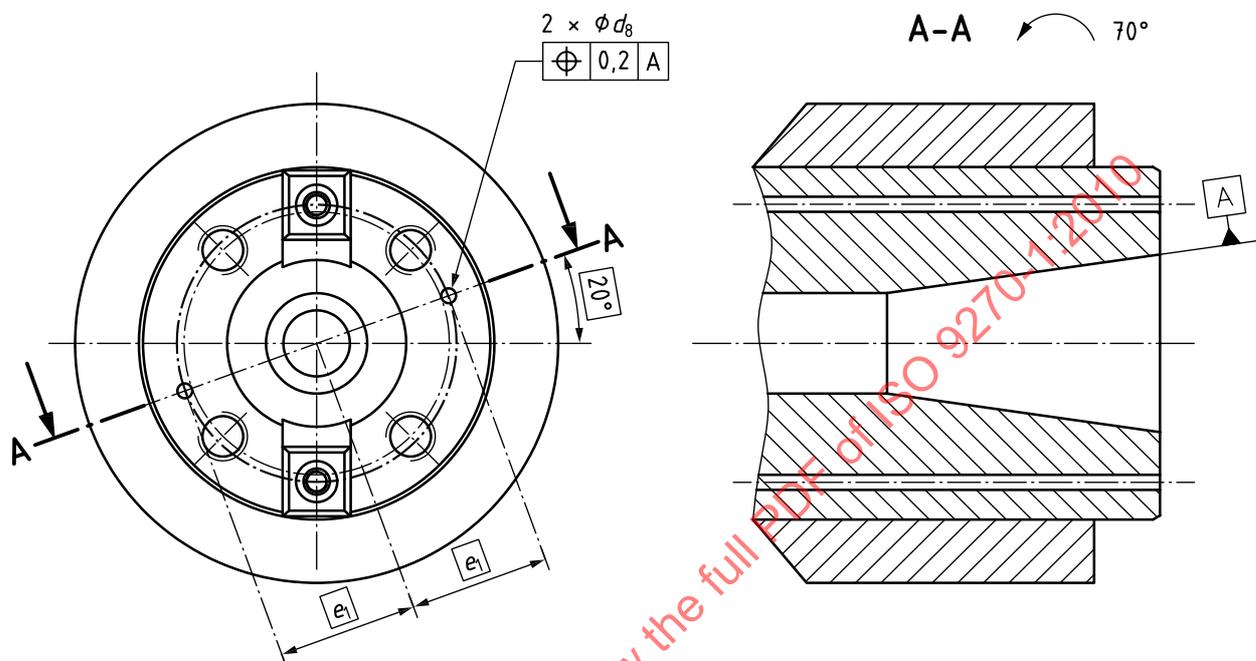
7/24 taper spindle noses of form SF for tool shanks of forms AF and UF
